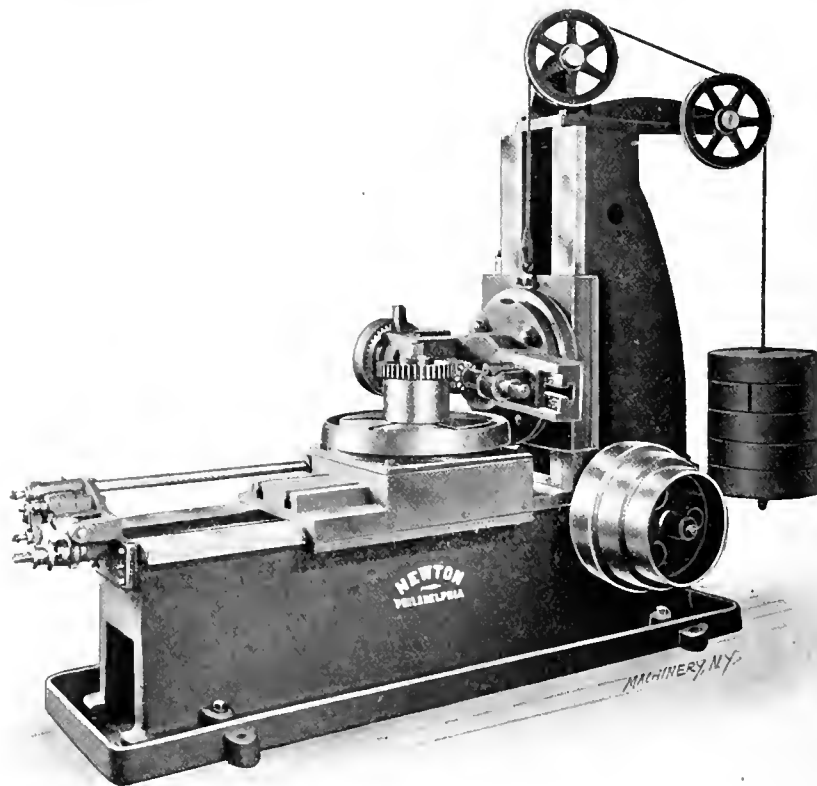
Newton Gear Hobbling Machine at Work on a Spur Gear.
